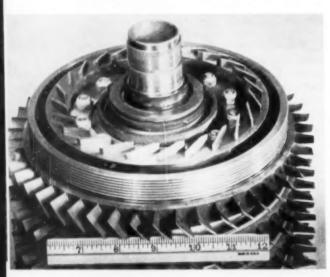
(above) Cooling air impeller in the Solar compressor rotor was machined from plate stock and bolted to the hub. This machined part was replaced with a precision casting, which lowered the cost of the impeller and enabled the labyrinth seal grooves to be cast integral with the impeller.
